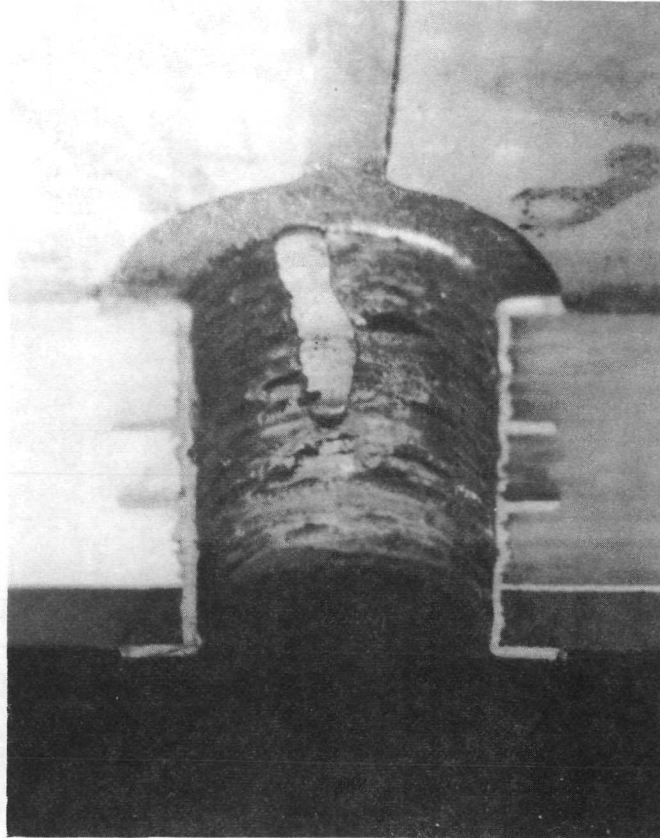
Photomacrograph (24X) of a Sectioned Plated-Through Hole with Void Defect Used to Obtain the Data in Figure 35.
